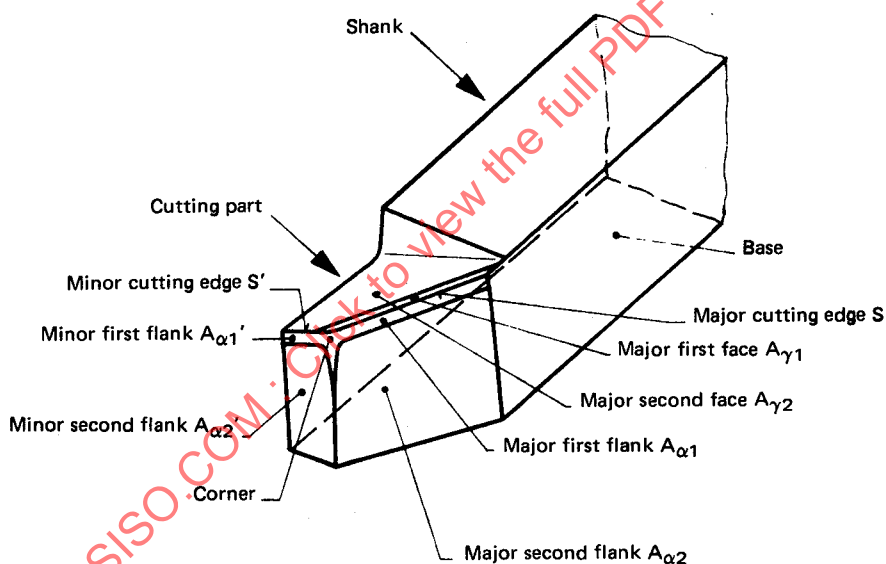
Cutting edges and surfaces on the cutting part of a turning tool
